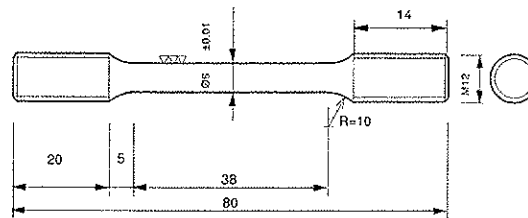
Geometry of tensile test specimen used for the projectile material (in mm).
